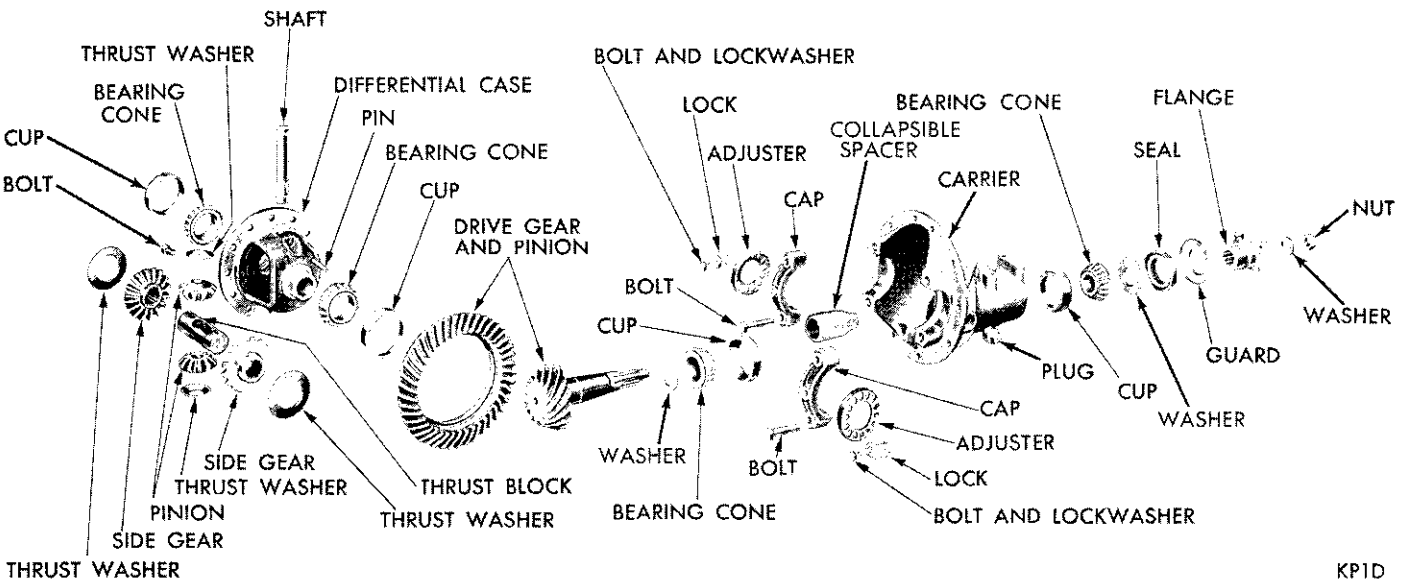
Differential Carrier Assembly (Large Stem Tapered Pinion)
